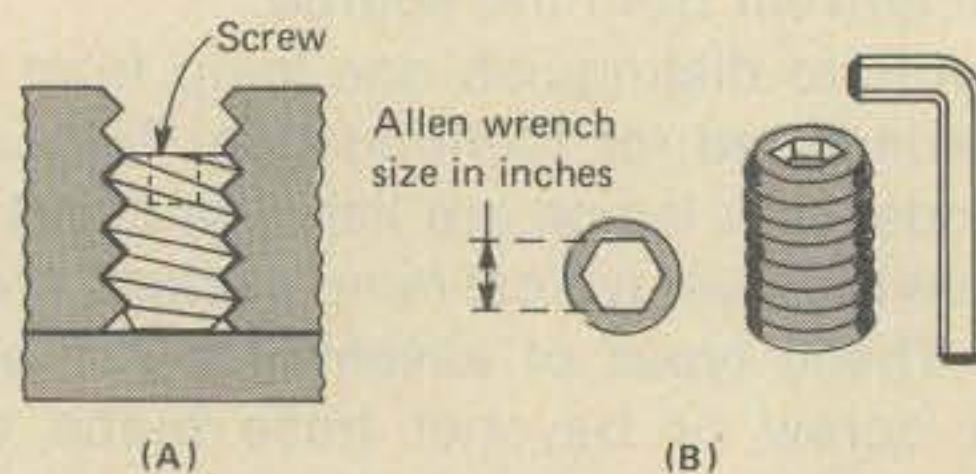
(A)—Recessed set screw. (B) Recessed set screw designed for Allen wrench.
